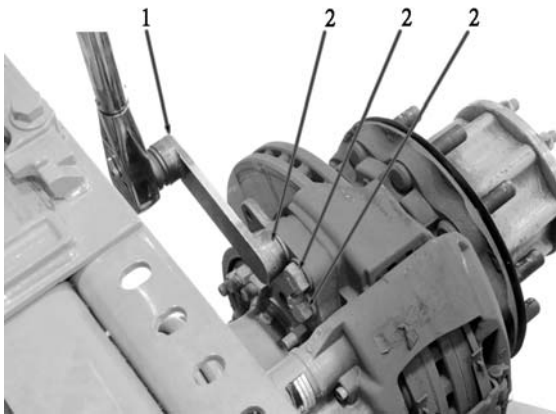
Steering Axle Lower Caliper Mounting Bolts
